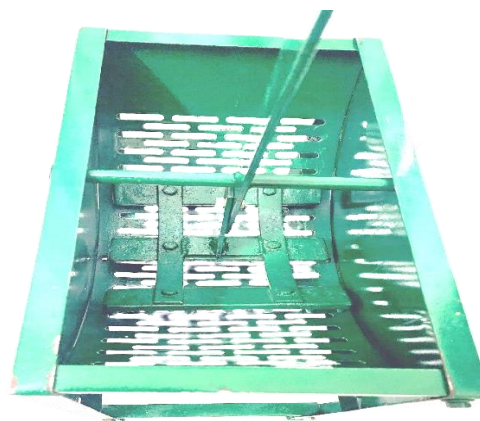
Oscillating Sector with Sieve Bottom and A Handle
